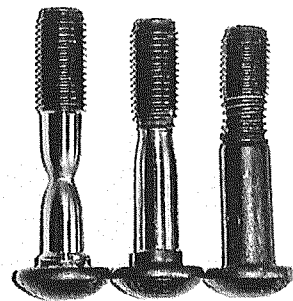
High Ductility Tension Bolt Failure Place
